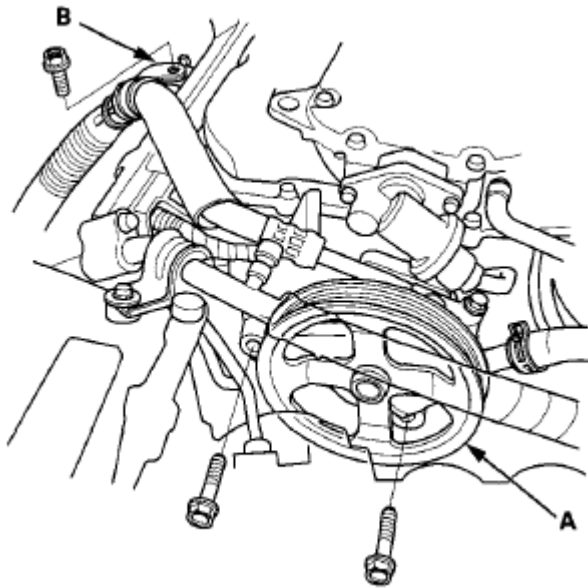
Removing Power Steering Pump And Power Steering Hose Clamp
